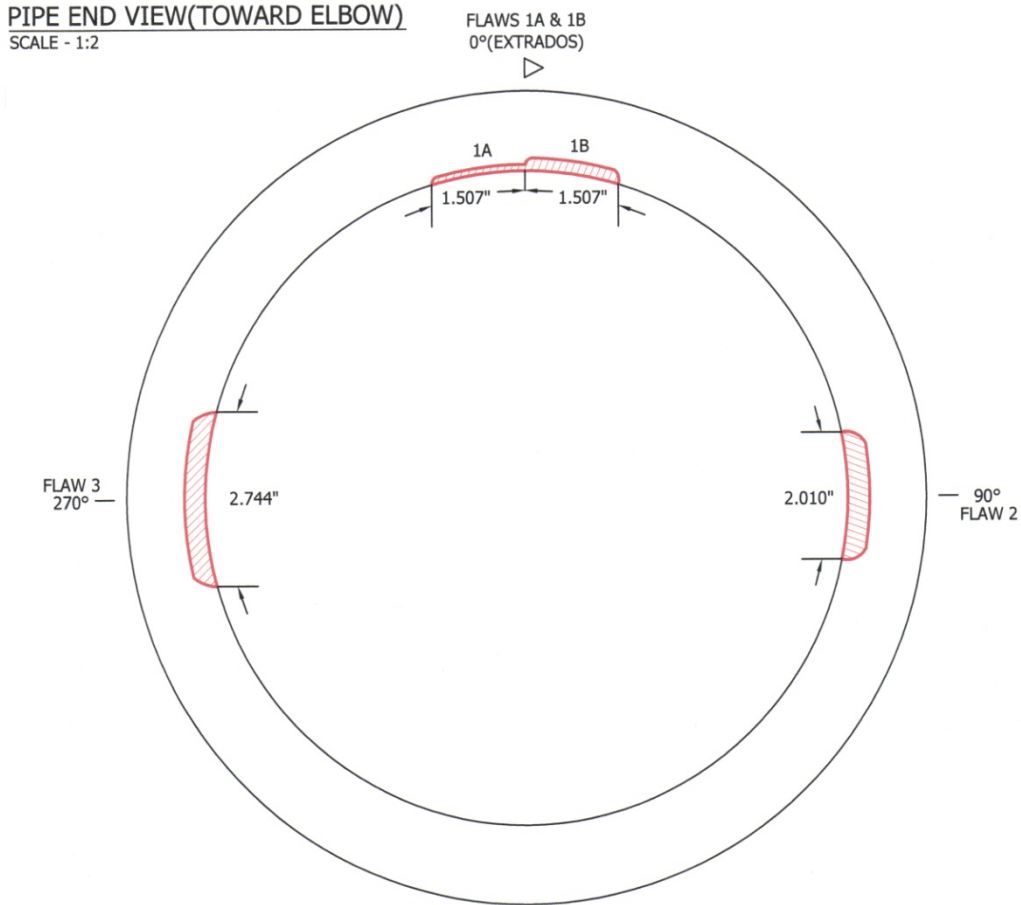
End View Illustration of All Four Thermal Fatigue Cracks Implanted into PZR CASS Specimen 9C-001 (courtesy of FlawTech, Inc.)
